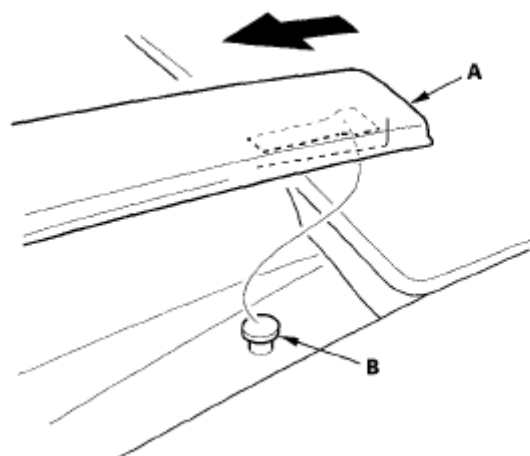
Releasing Rear End Of Roof Molding From Pin
